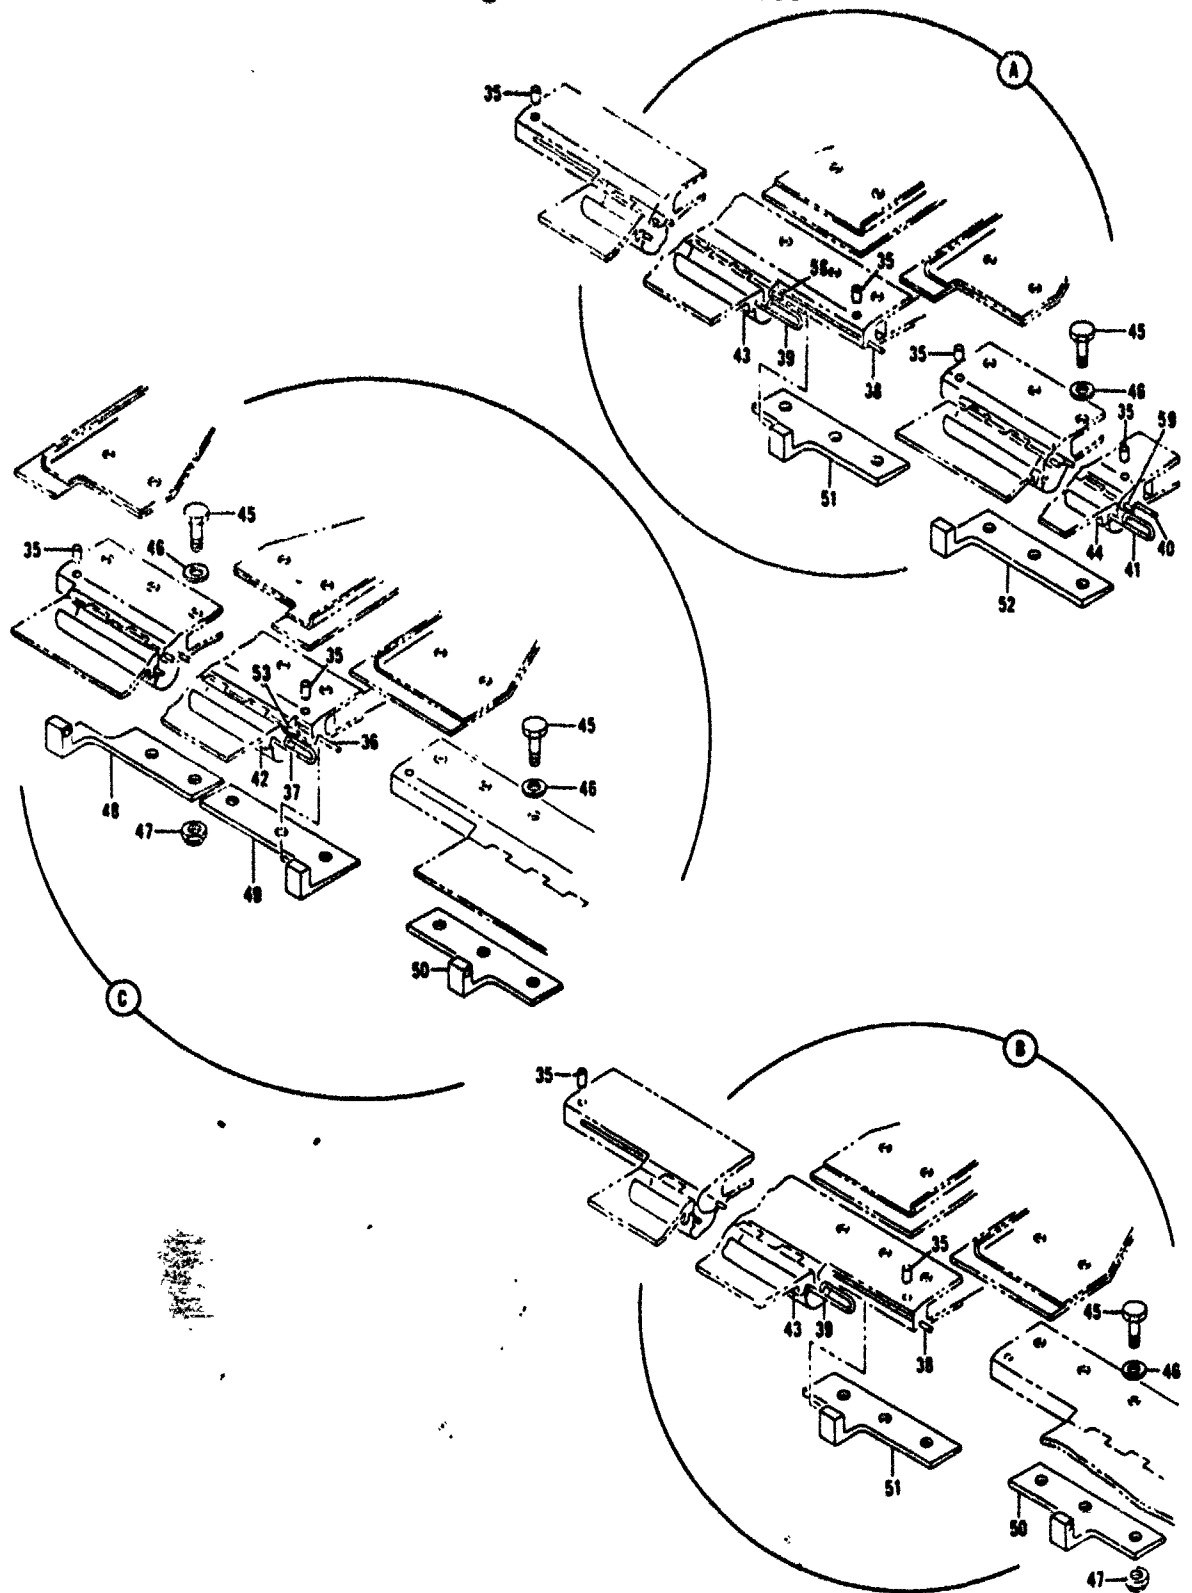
Outboard Wing Aileron and Tab Assemblies (Sheet 1 of 5)
